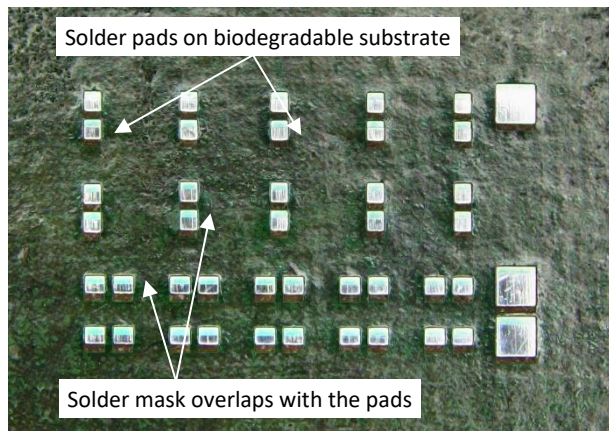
A specific case of solder mask positioning inaccuracy, the mask overlaps with the solder pads, thereby reducing the effective contact area for soldering
